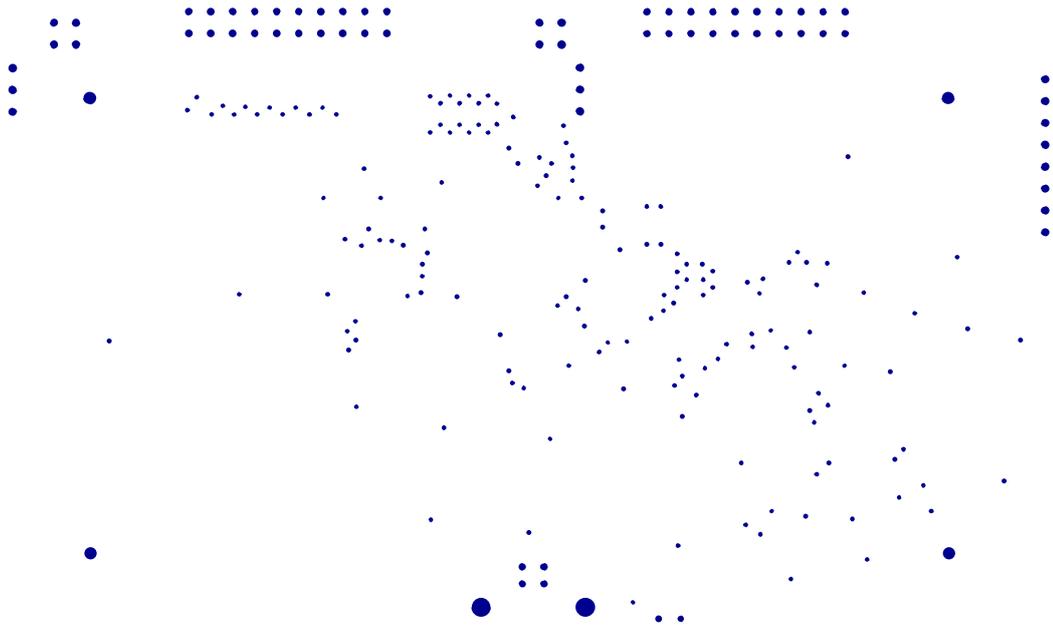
The drill hole layer of the PCB, visualized using the Gerber files.
